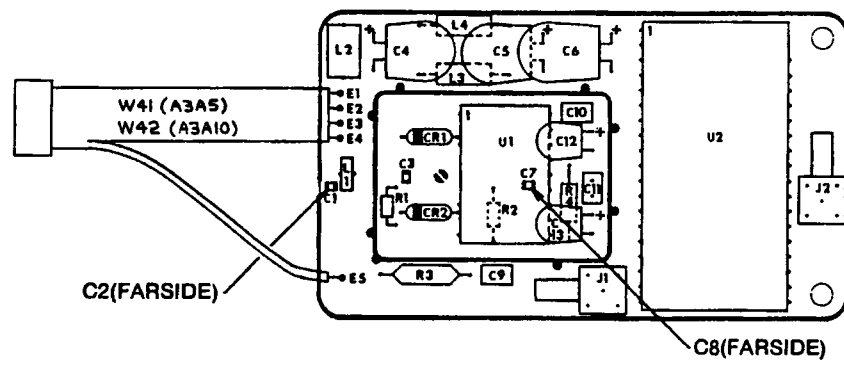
A3A4 N/1 Divider PCB Assembly
